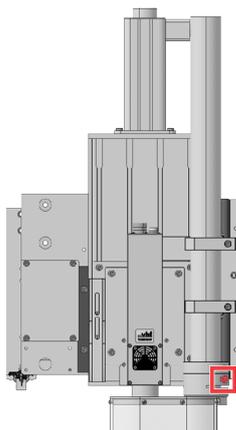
FASTENING THE SCREW OF THE PROTECTIVE COVER
